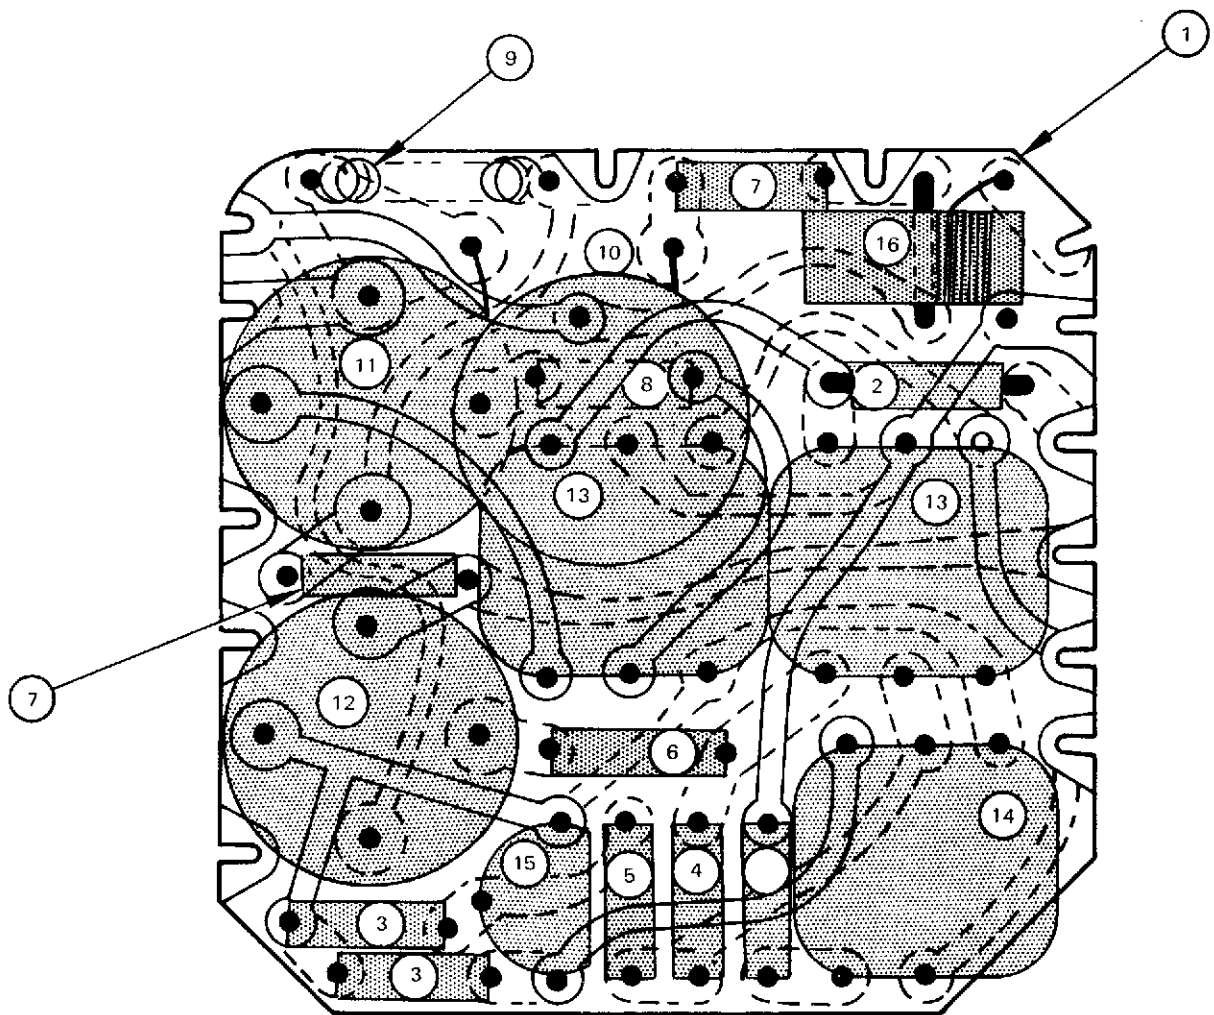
CIRCUIT BOARD ASSEMBLY – BOTTOM 1 AMP AC POWER CONTROLLER
